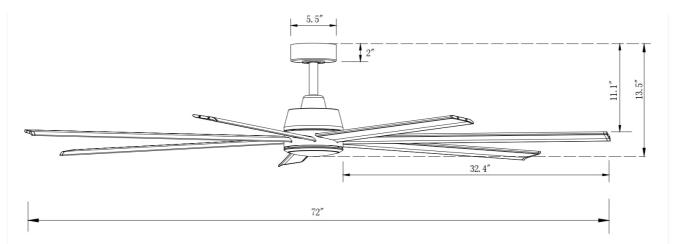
Dimensional drawing showing the fan's 72-inch diameter and 13.5-inch height.
